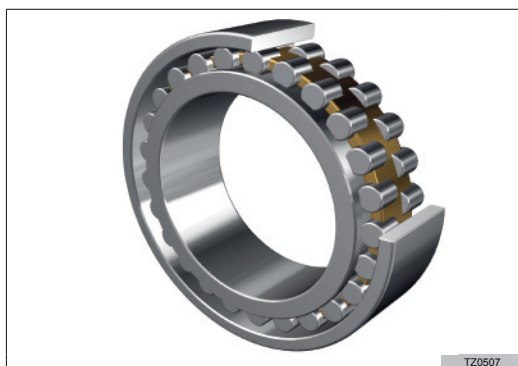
Double-row cylindrical roller bearing with an open-end outer ring
